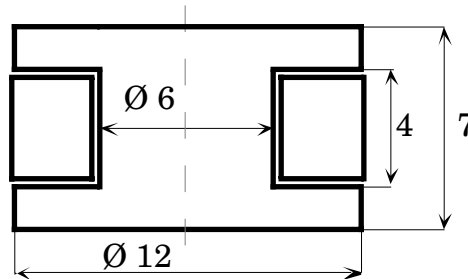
Geometry of the search coils used on the rotor surface. The dimensions are in millimeters.
